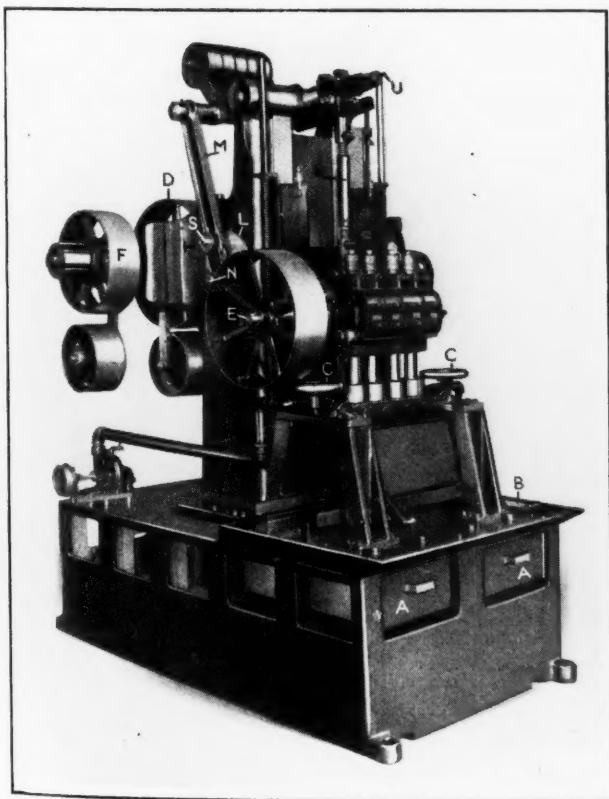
Moline Automatic Multiple-spindle Cylinder Lapping Machine
